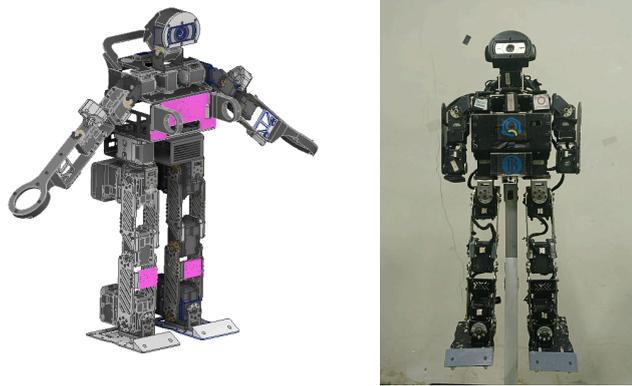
The CAD design and a picture of robot: Hiro and Tomo
